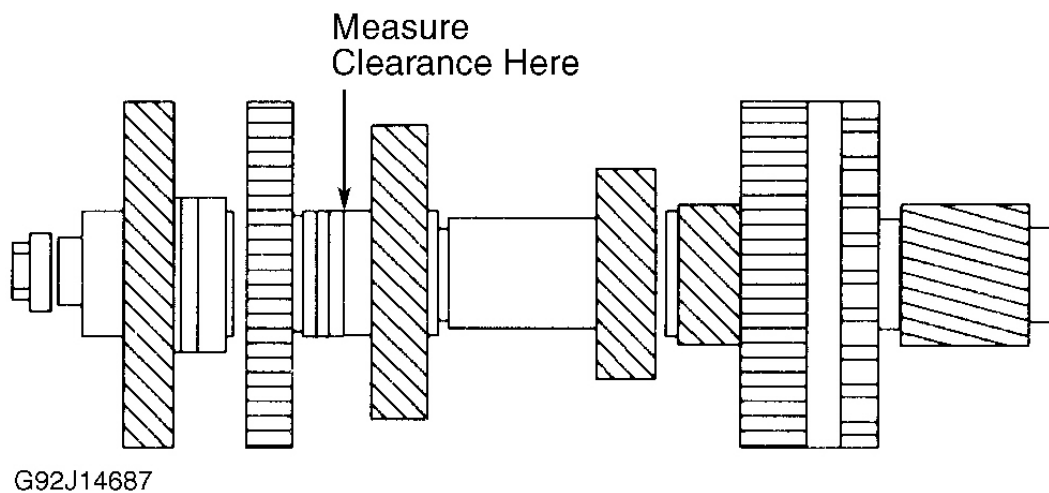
Checking 2nd Gear-To-Dog Clutch Hub Clearance
